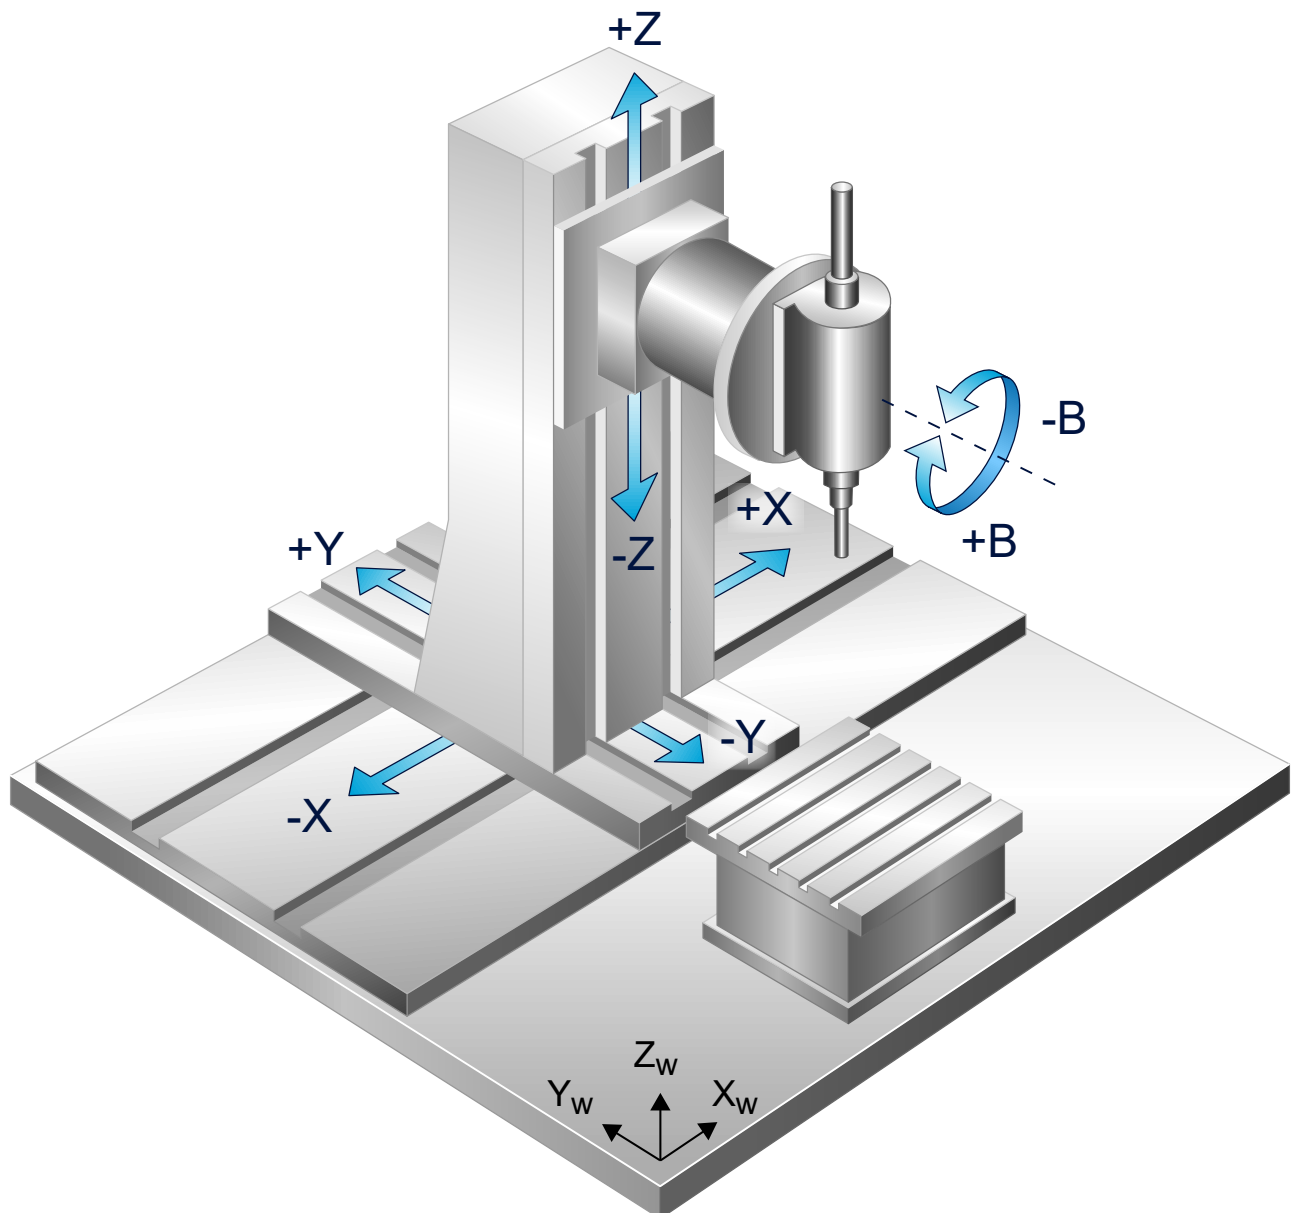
Kinematic structure of the 4-axis milling machine with double spindle head
